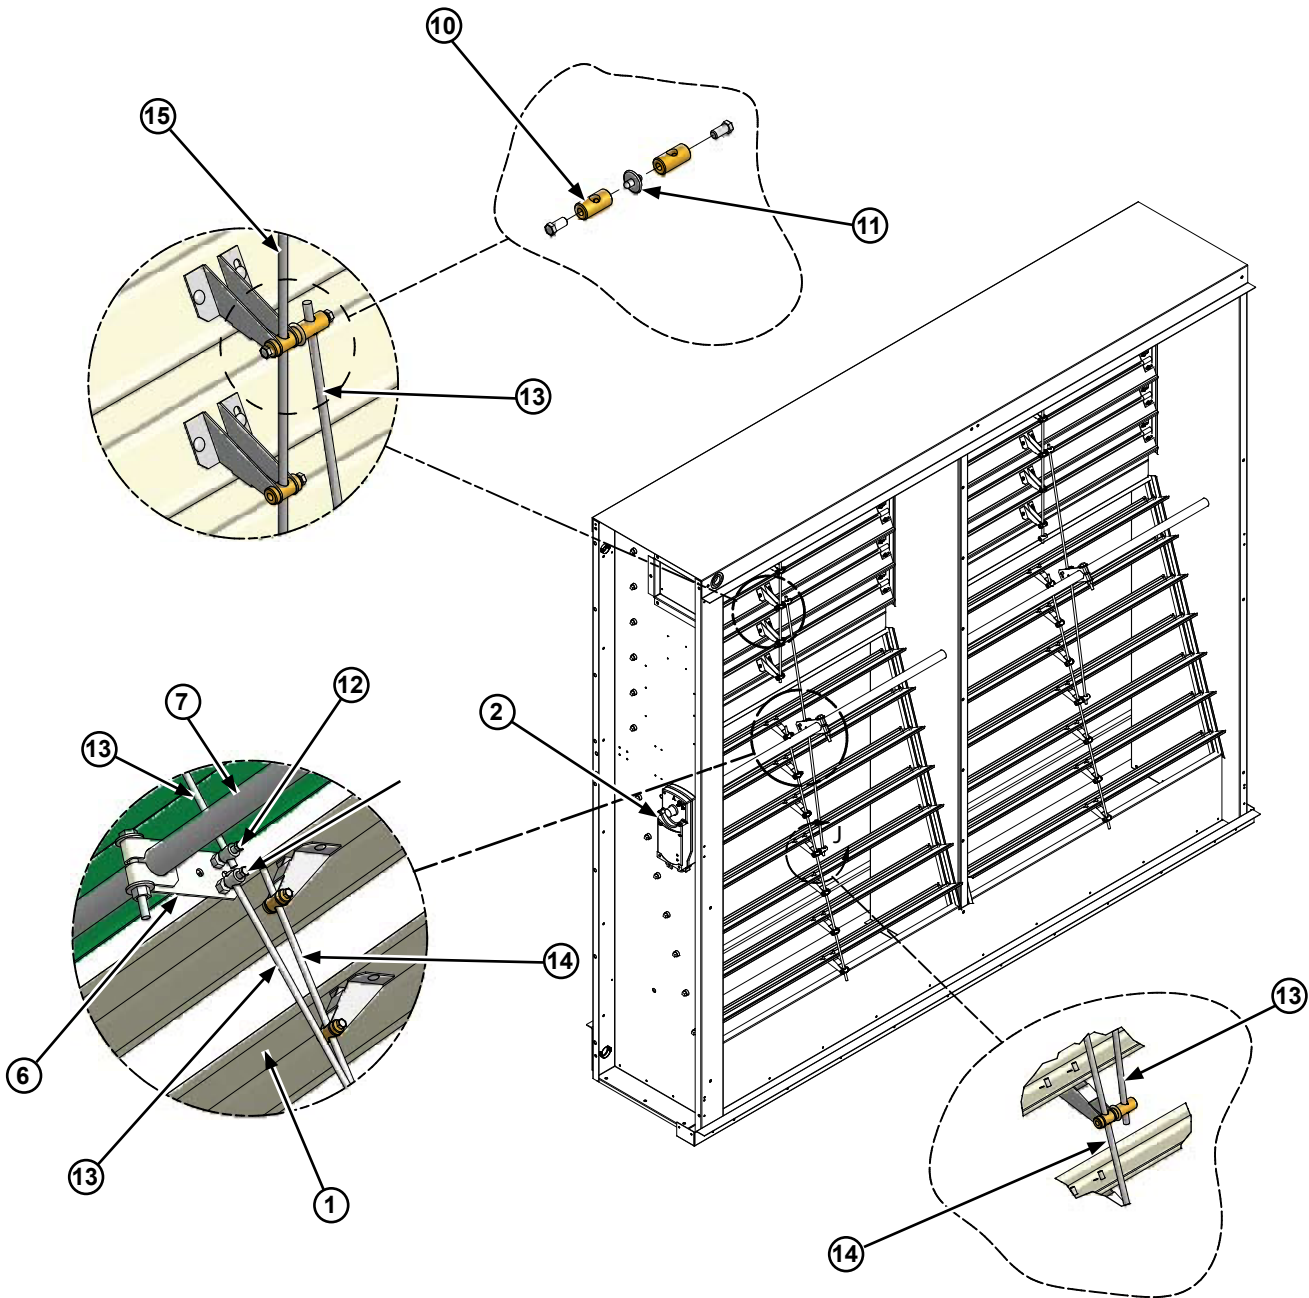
OUTDOOR/RETURN DAMPER ASSEMBLY
